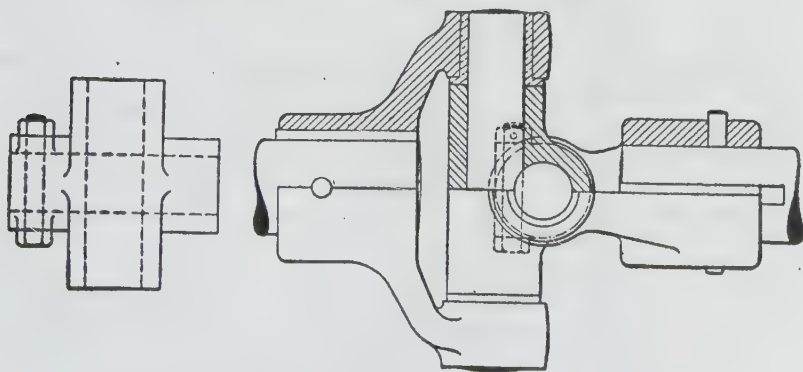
CROSS TYPE OF UNIVERSAL JOINT.
